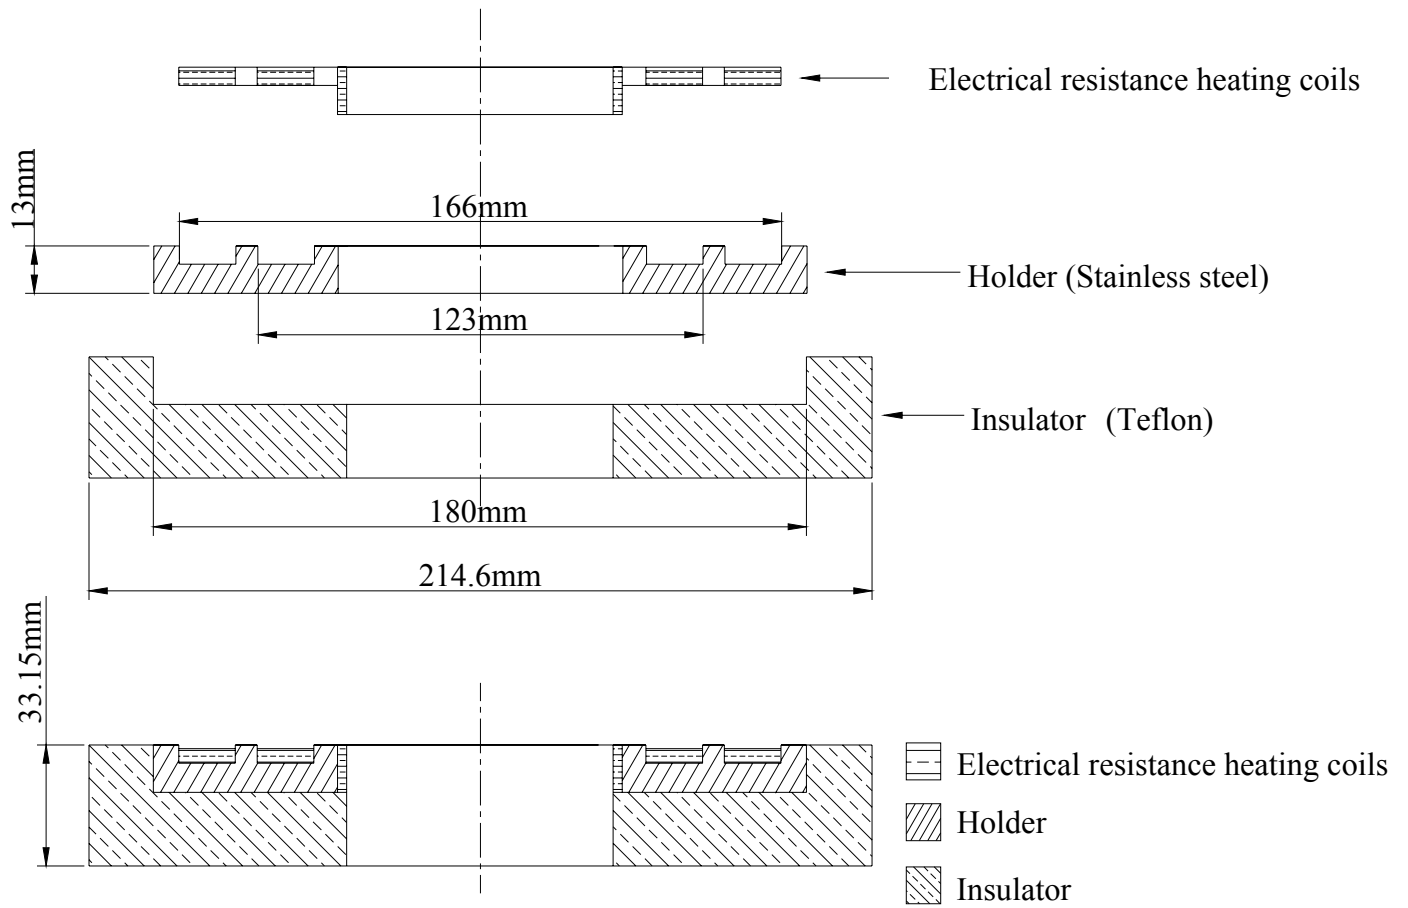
The heater consists of three parts: resistance heating element, holder and insulator.
